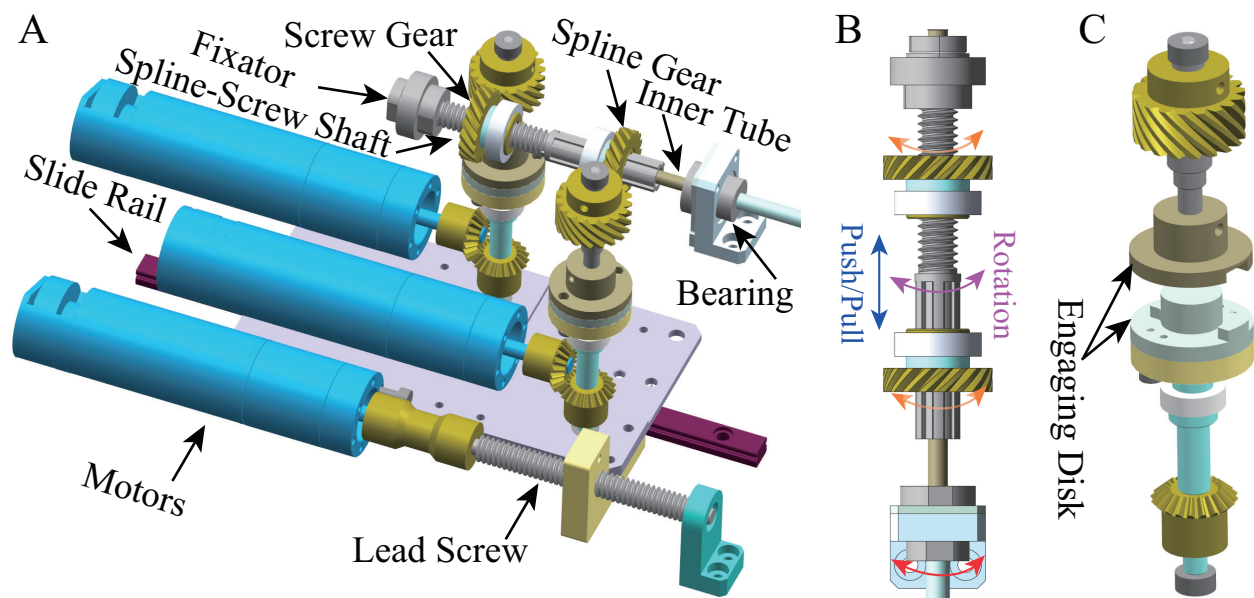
key actuation module for a single segment. (A) The outer tube is fixed on a bearing, and the inner tube is fixed on a spline-screw shaft. One DC motor rotates a lead screw to realize translation of the whole module. (B) Two gears (a spline gear and a screw gear) are respectively assembled on the shaft. Once the two gears rotate at an equal velocity (labeled by orange arrows), the shaft rotates accordingly (purple arrow). When the screw gear rotates and the spline gear keeps static, translational motion is achieved and the inner tube is being pushed or pulled (blue arrow). Two pairs of helical gear transmit motion from the motors. (C) For quick release/assembly, we designed engaging disk structures on the instrument component and the actuation component. The angle gear connects with a DC motor.
